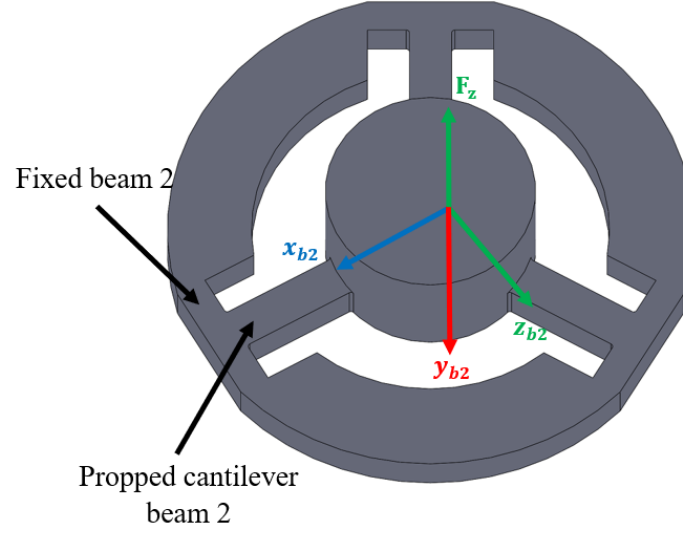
Propped cantilever beam 2 under the shear force  $F_z$
